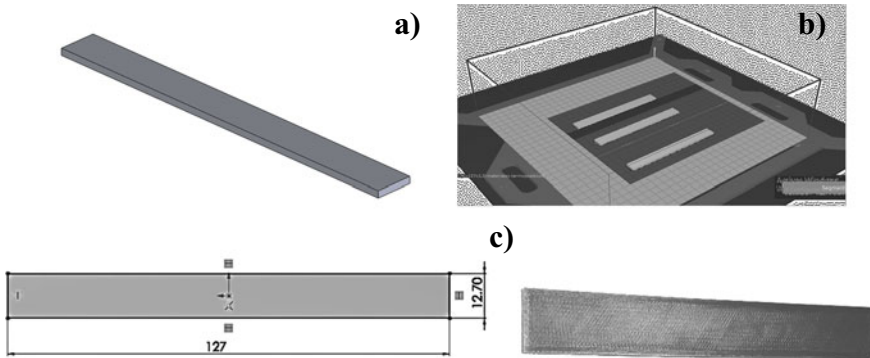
a Isometric view of the layout of flexion specimen according to ASTM D790-17 specifications, b manufacturing process in a 3D printing software. c Flexion specimen made according to the specifications of the standard
